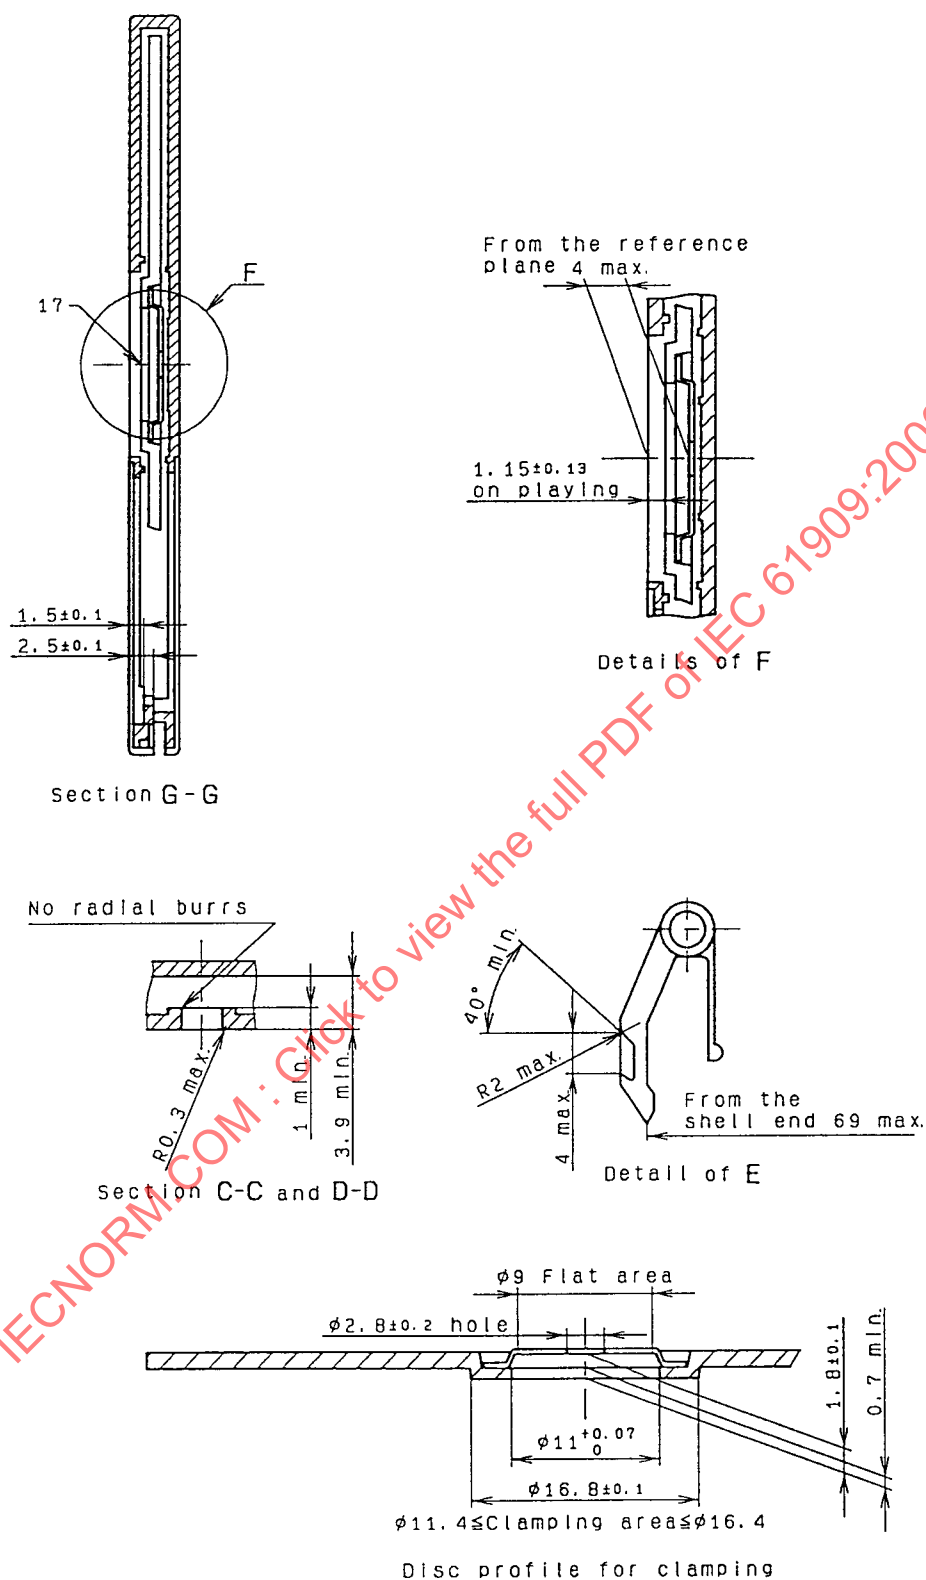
Bottom view and shutter of MD cartridge specifications for the recordable version
